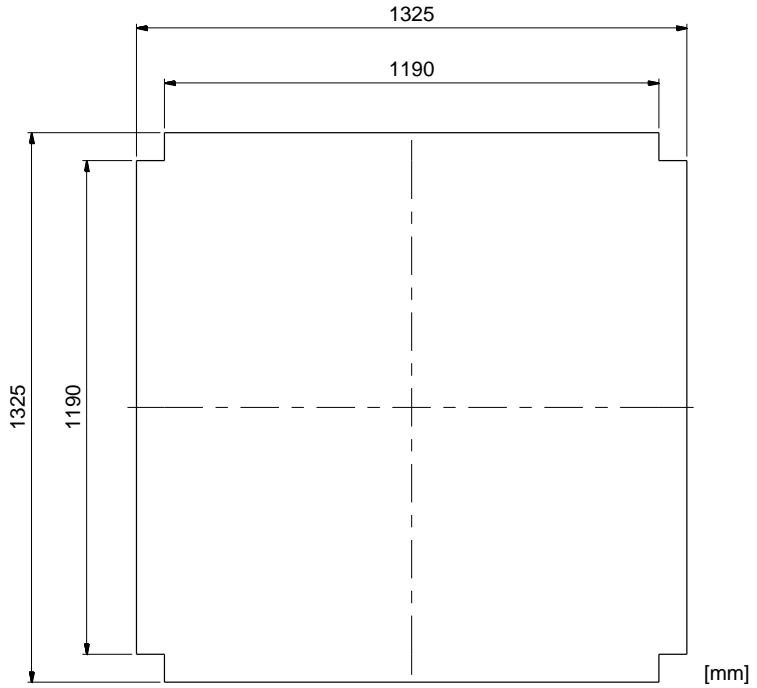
Dimension for the *BOTTOM BOARD*. (Art. 11540)
